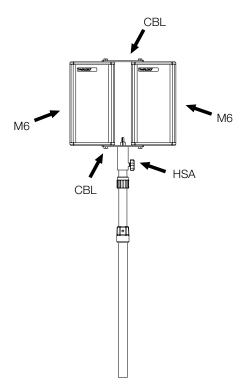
Assembly CBL to M6 Lautsprecher on HSA
